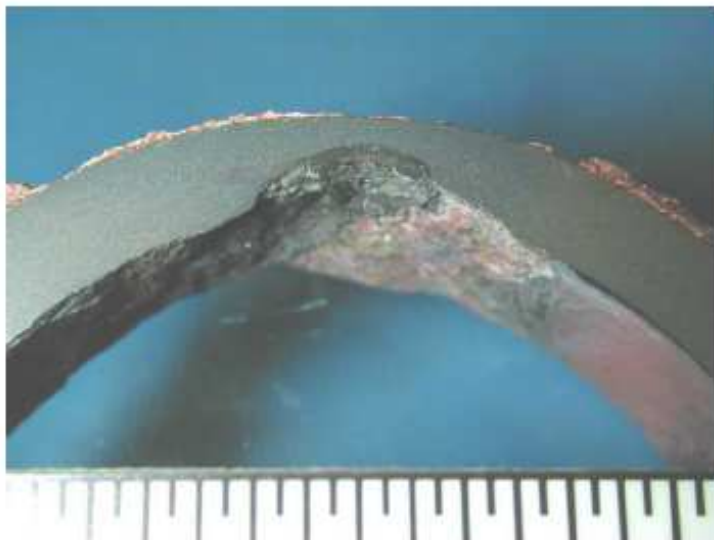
Cross-section of tube in Figure 4-99 showing localized attack due to caustic
